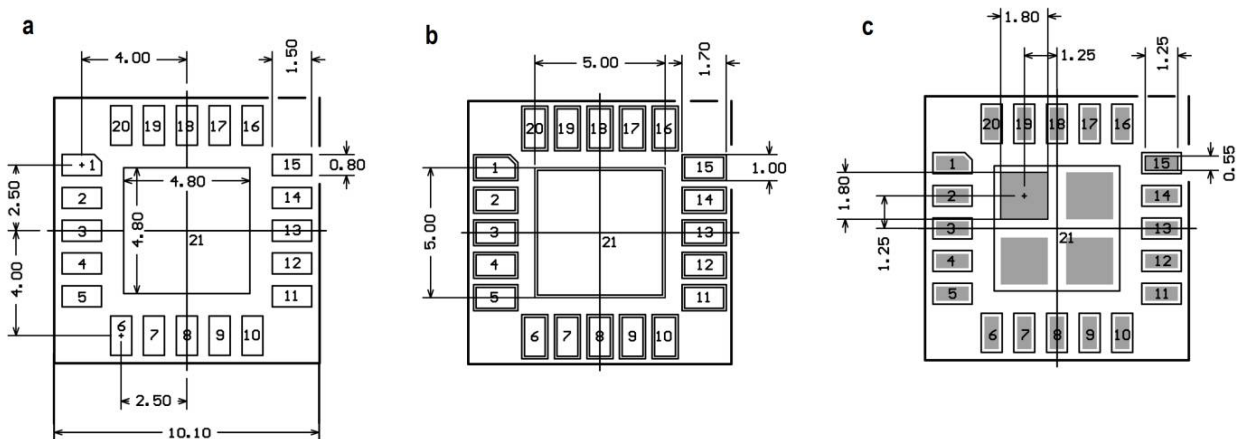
SCD4x footprint (top view): landing pads (a), solder mask (b) and solder paste (c).
